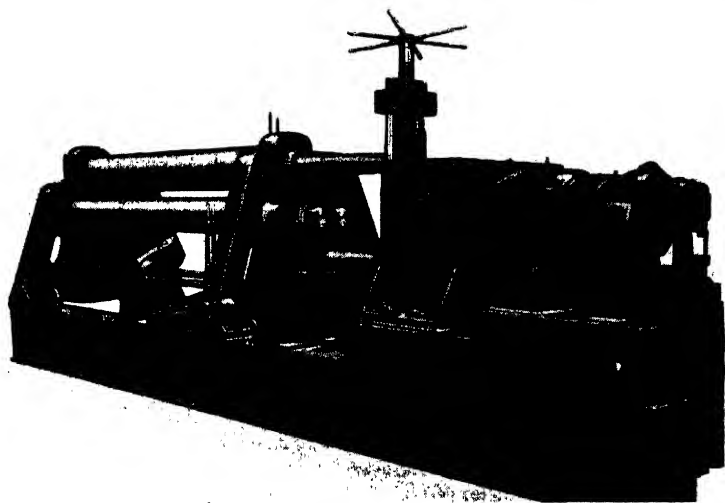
COMBINED PLATE BENDING AND STRAIGHTENING ROLLS
